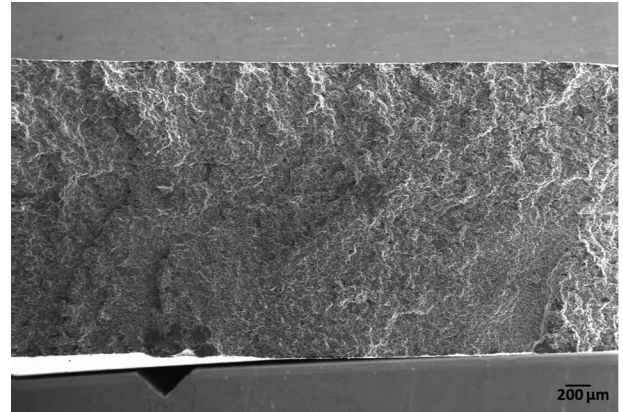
Fracture surface of a tensile-tested dissimilar weld joint of AA 2219-AA 5083 TIG welded. The specimen was tested at 20 K and failed at AA 5086 side weld interface
